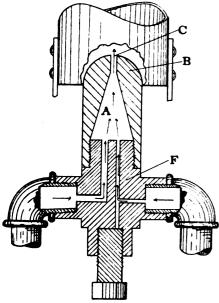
showing sectional view of "T" PIECE OF OIL BURNER.
